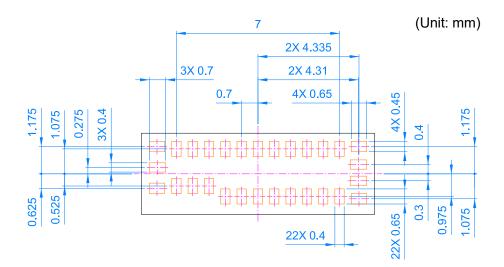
Recommended dimensions of the module footprint conductor layer pads (Top view)
